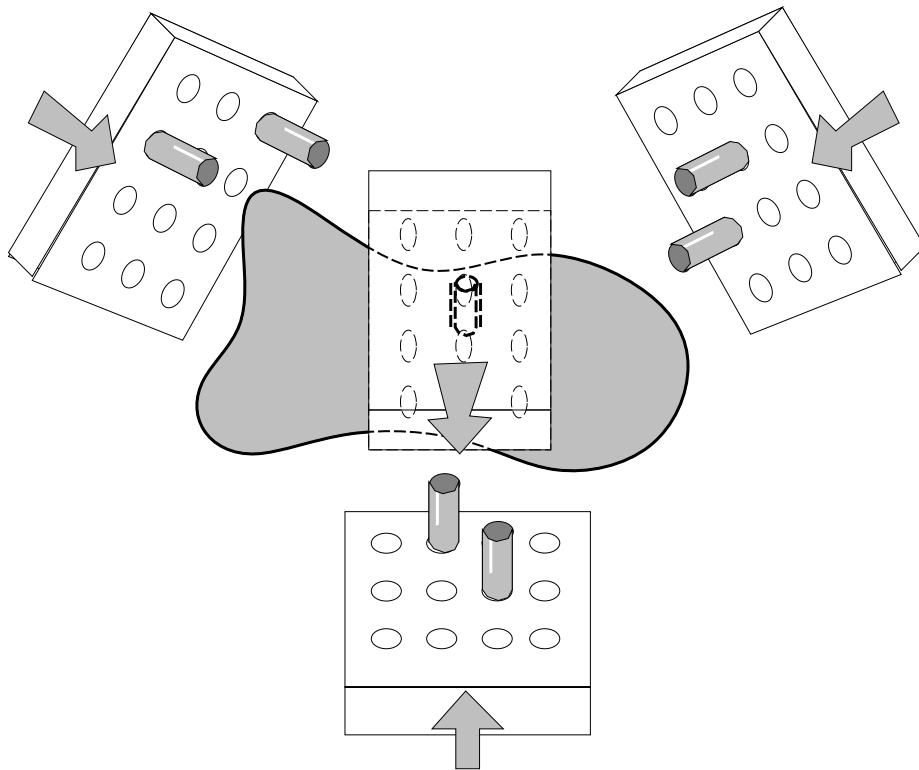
A three dimensional four jaw chuck modular toolkit.
